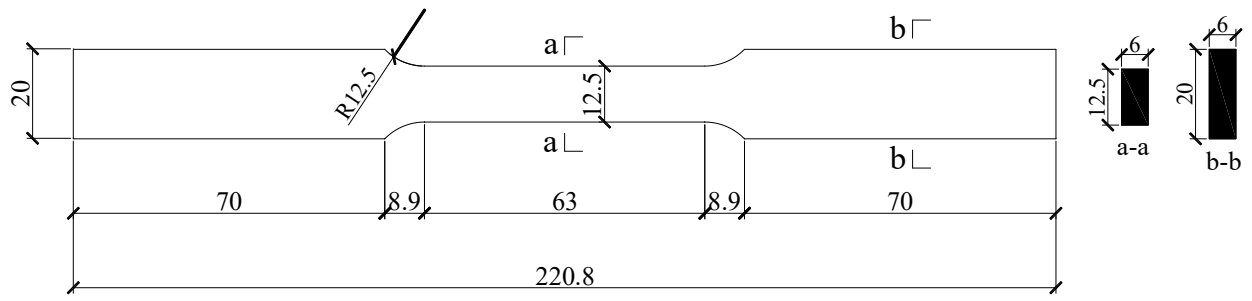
Dimensions of flat tensile coupons (dimensions in mm).
